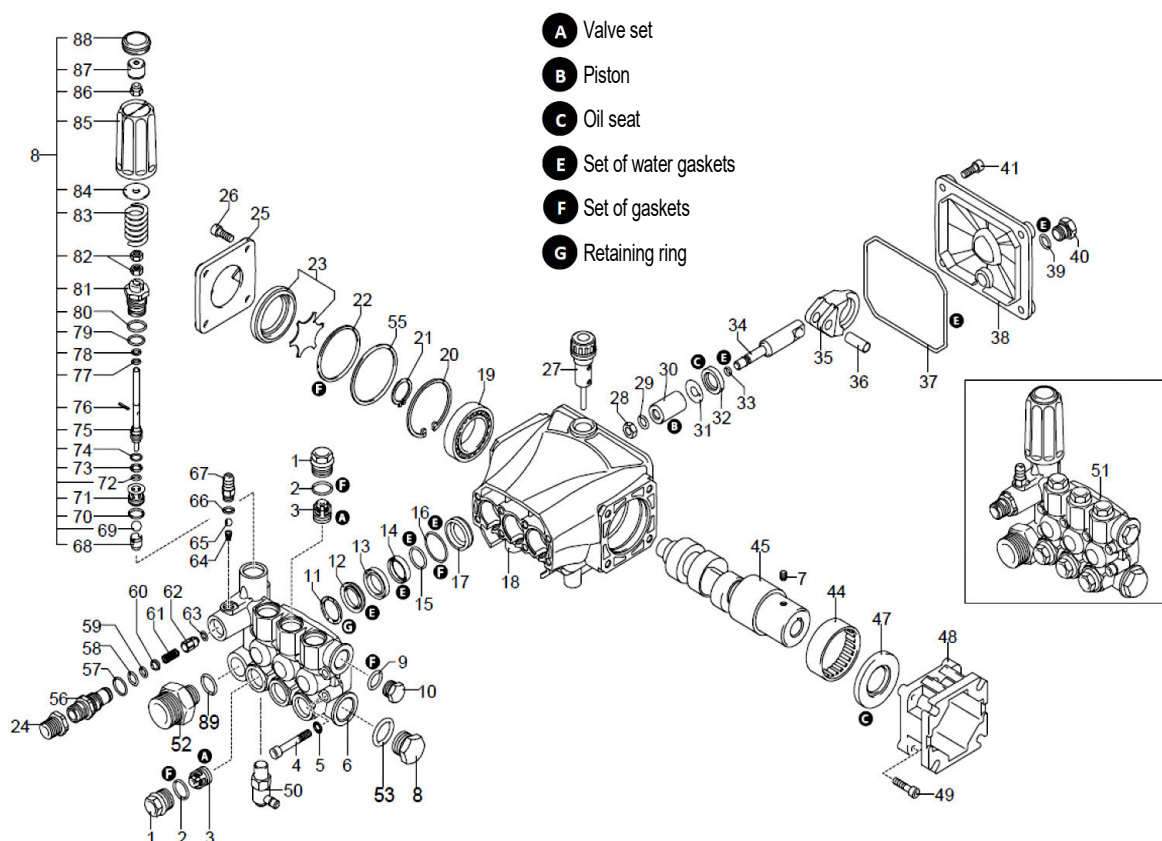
Spare parts drawing 3 and spare parts drawing 4 HDR-K 72-22 BH
